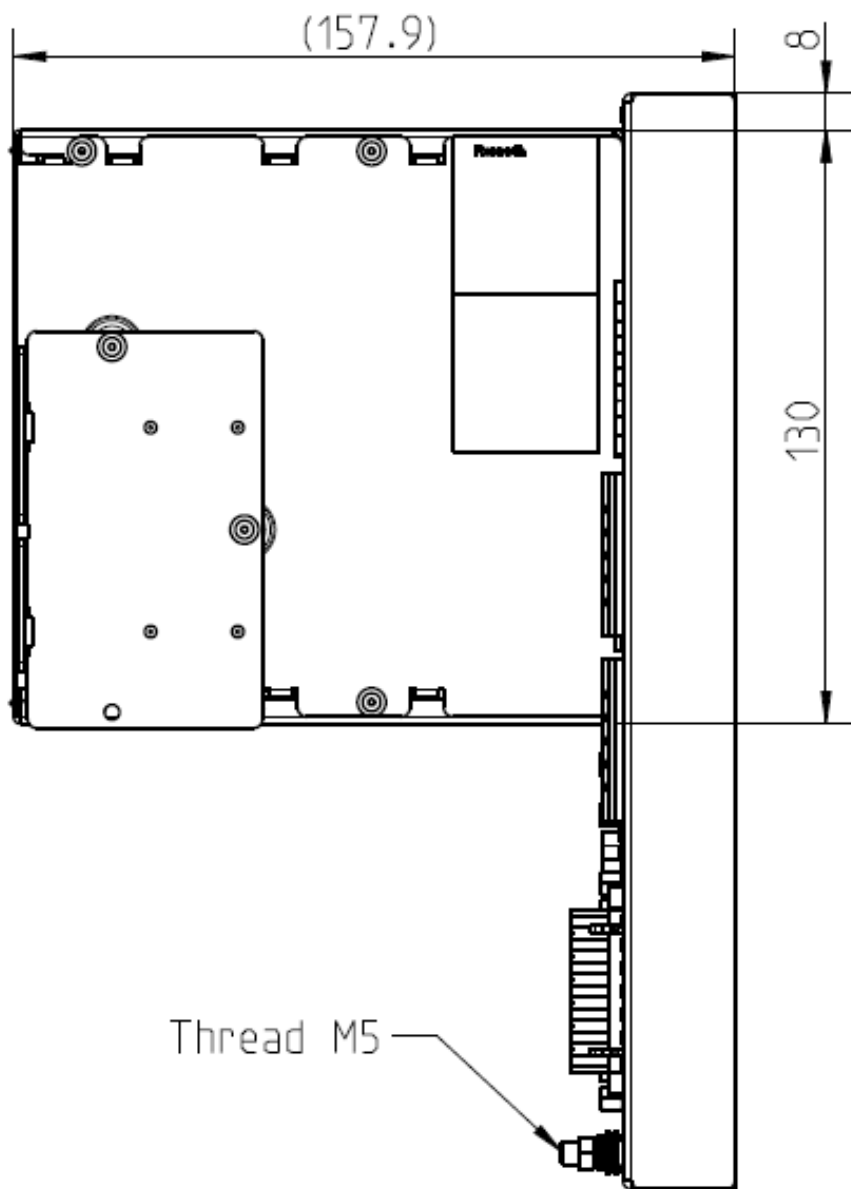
Dimensions (side view) of the NYS04.2-ST-02-ULNN-NY4023
